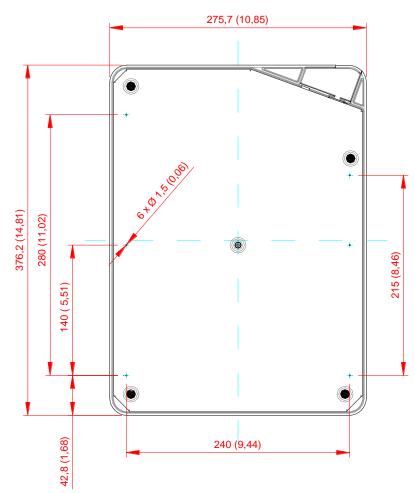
Dimensions of the antenna and positions of mounting holes (backside)
